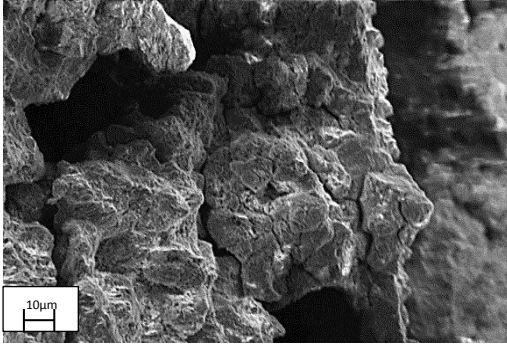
S545 U-bend specimen showing intergranular SCC on fracture surface.
